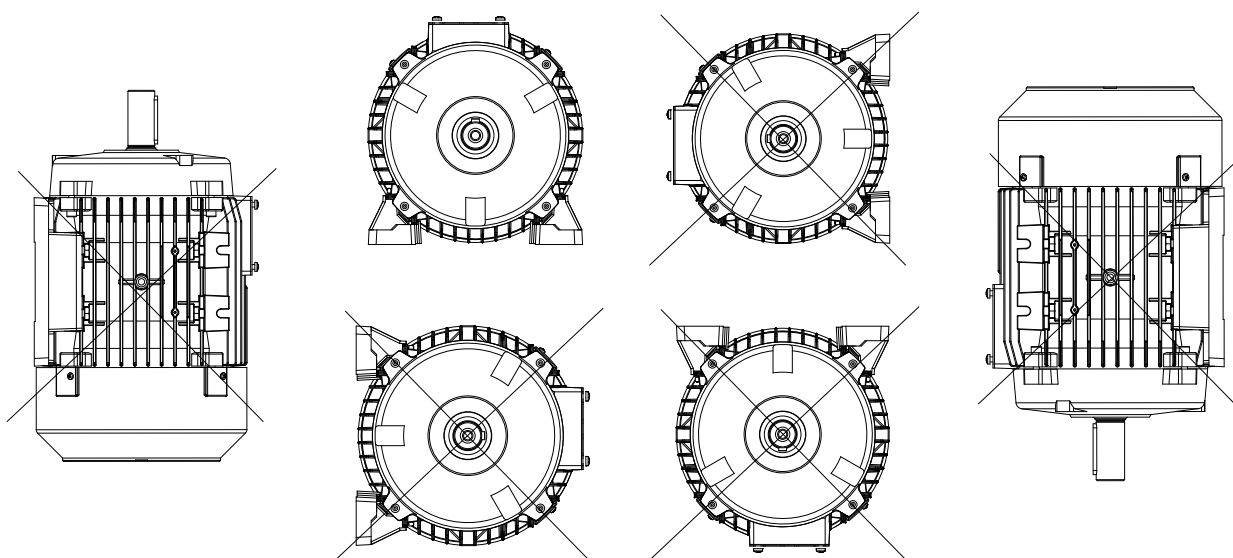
Adapter Plate, Guide for Drilling Holes
